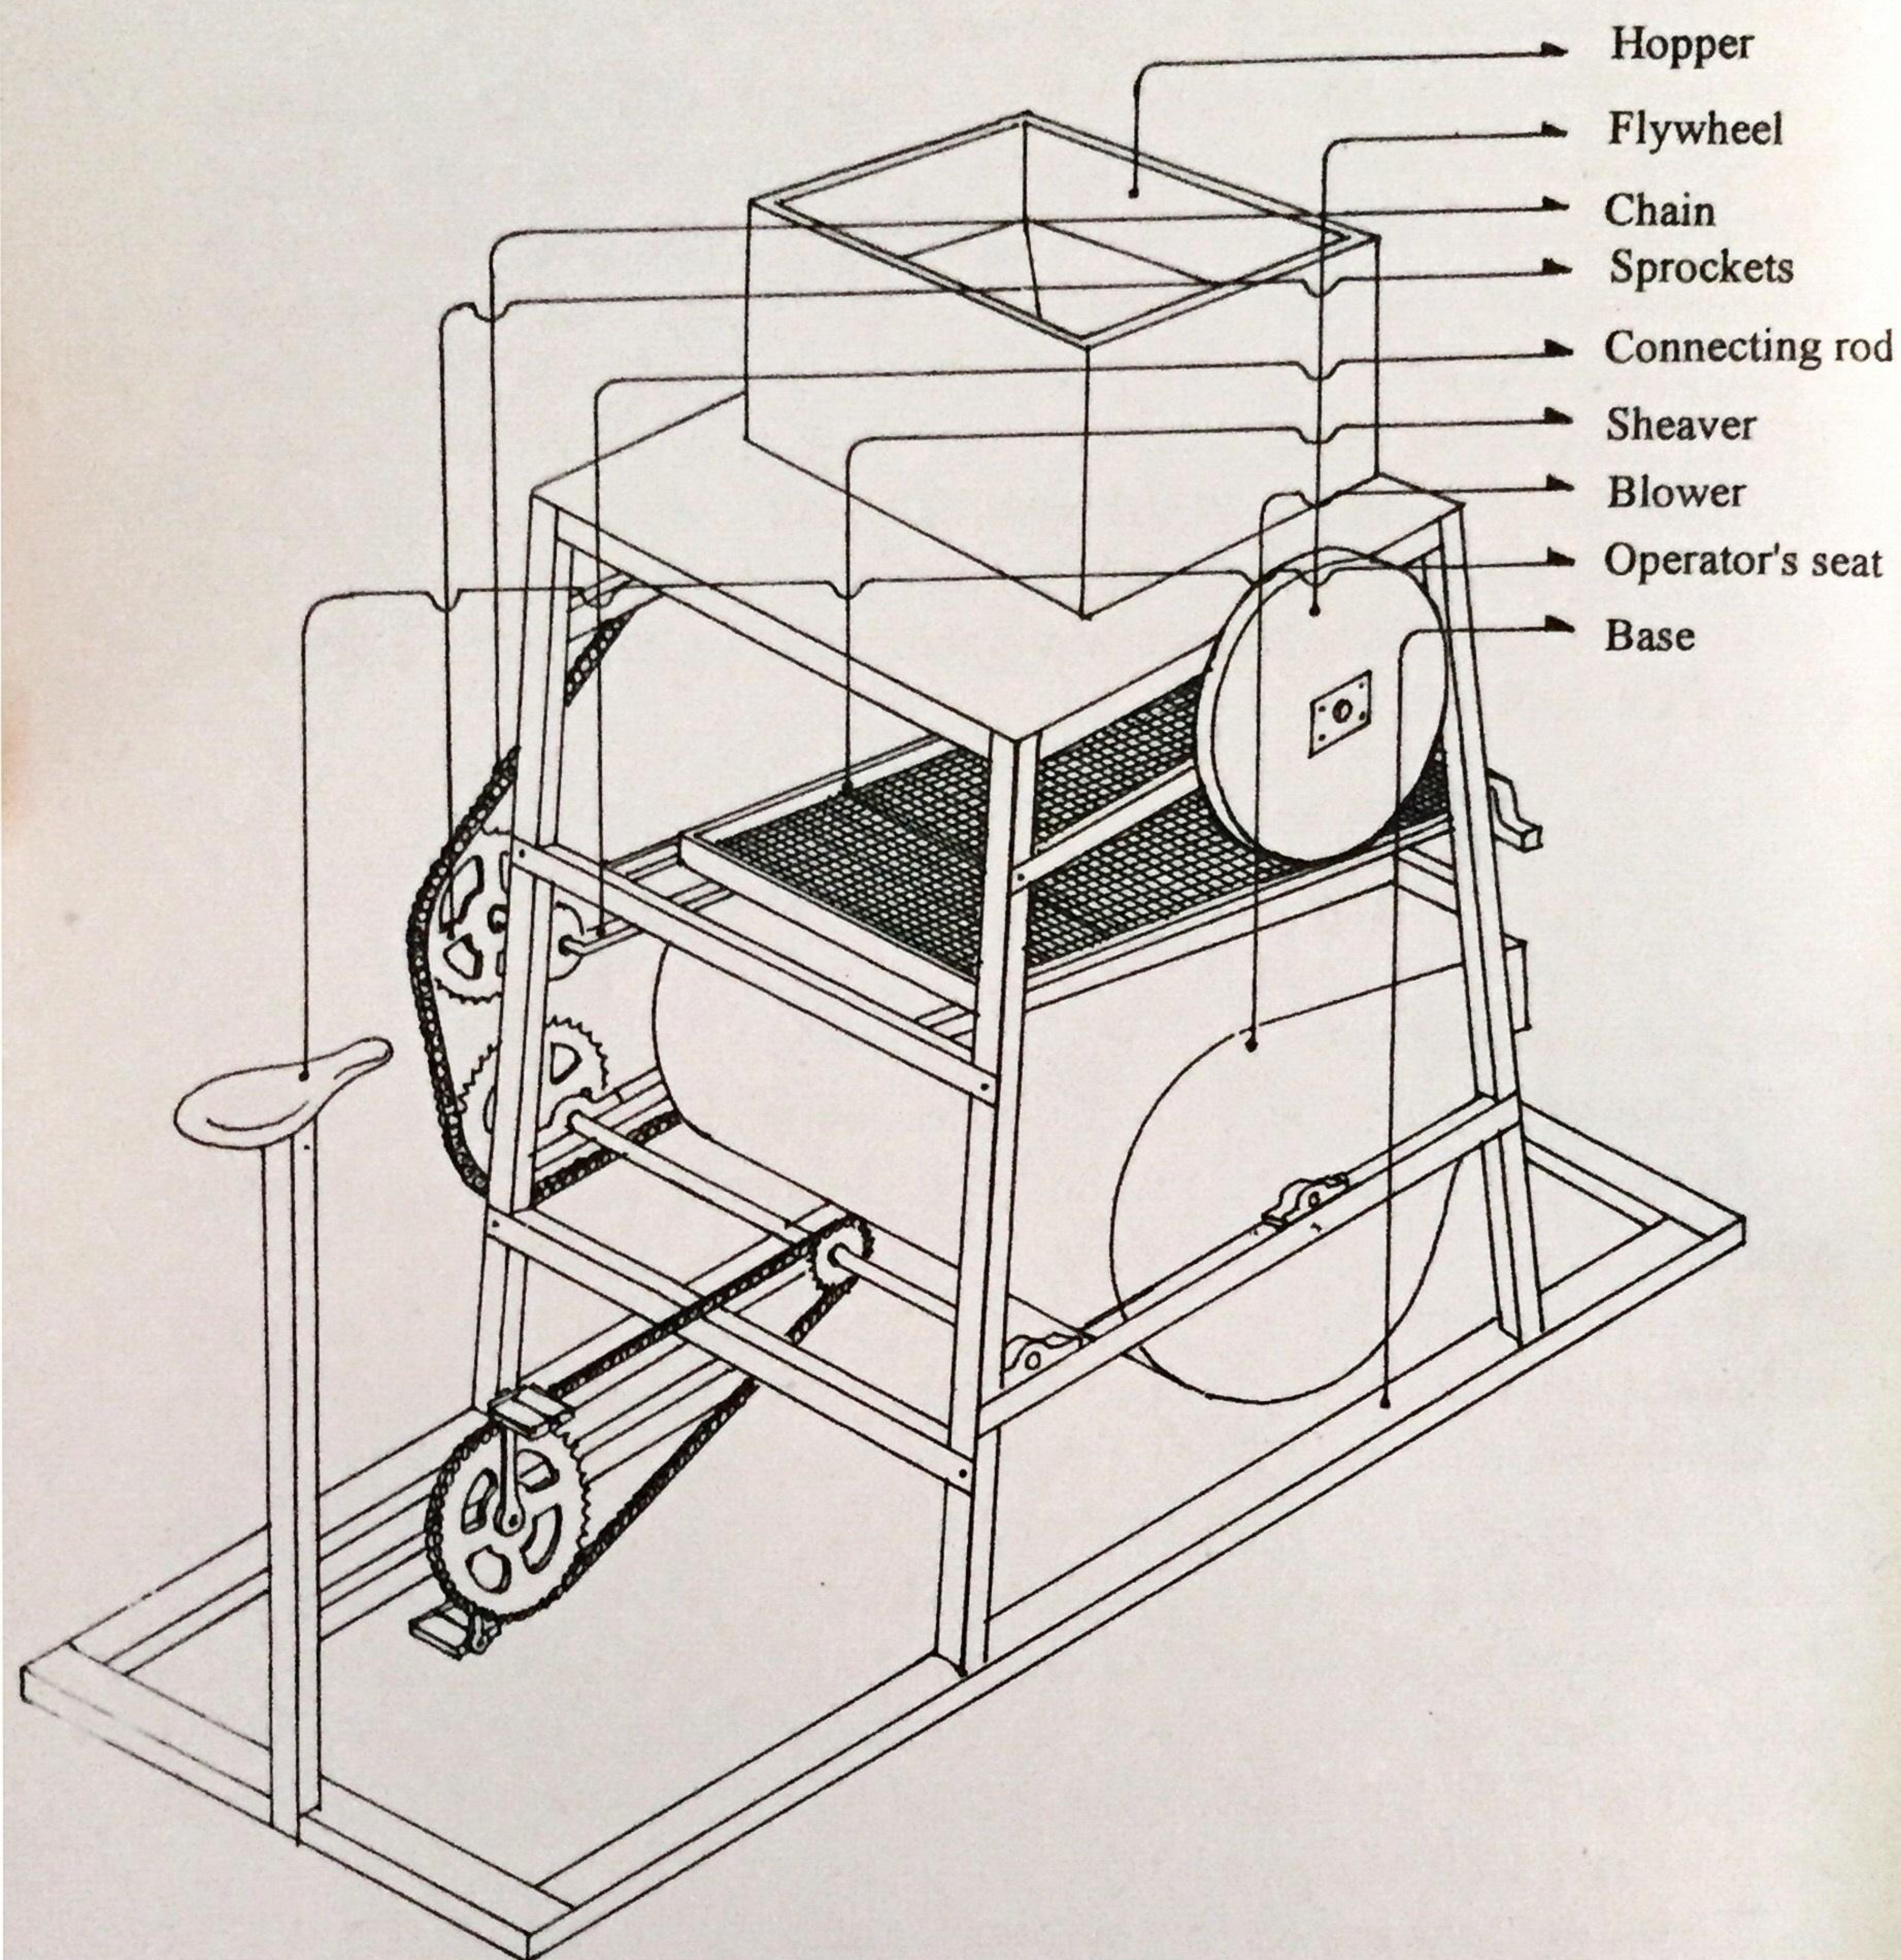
Isometric drawing of the pedal-operated coffee pulper.
